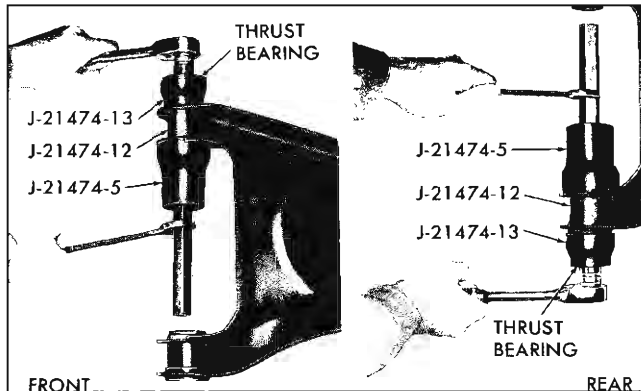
Lower Control Arm Bushing Installation—Chevelle
